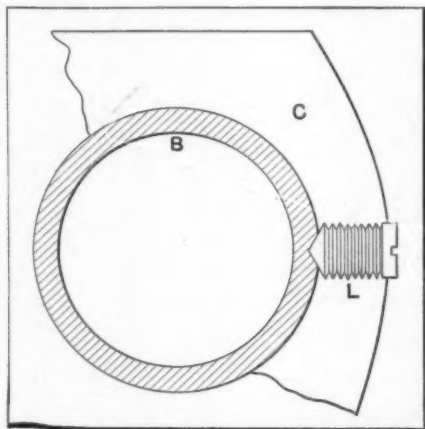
Method of holding the camshaft bushings secure and preventing them from turning
